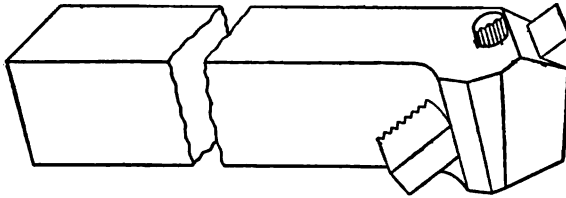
A patented tool holder which allows close contact of tool and holder and insures an unusual degree of rigidity in the tool.
